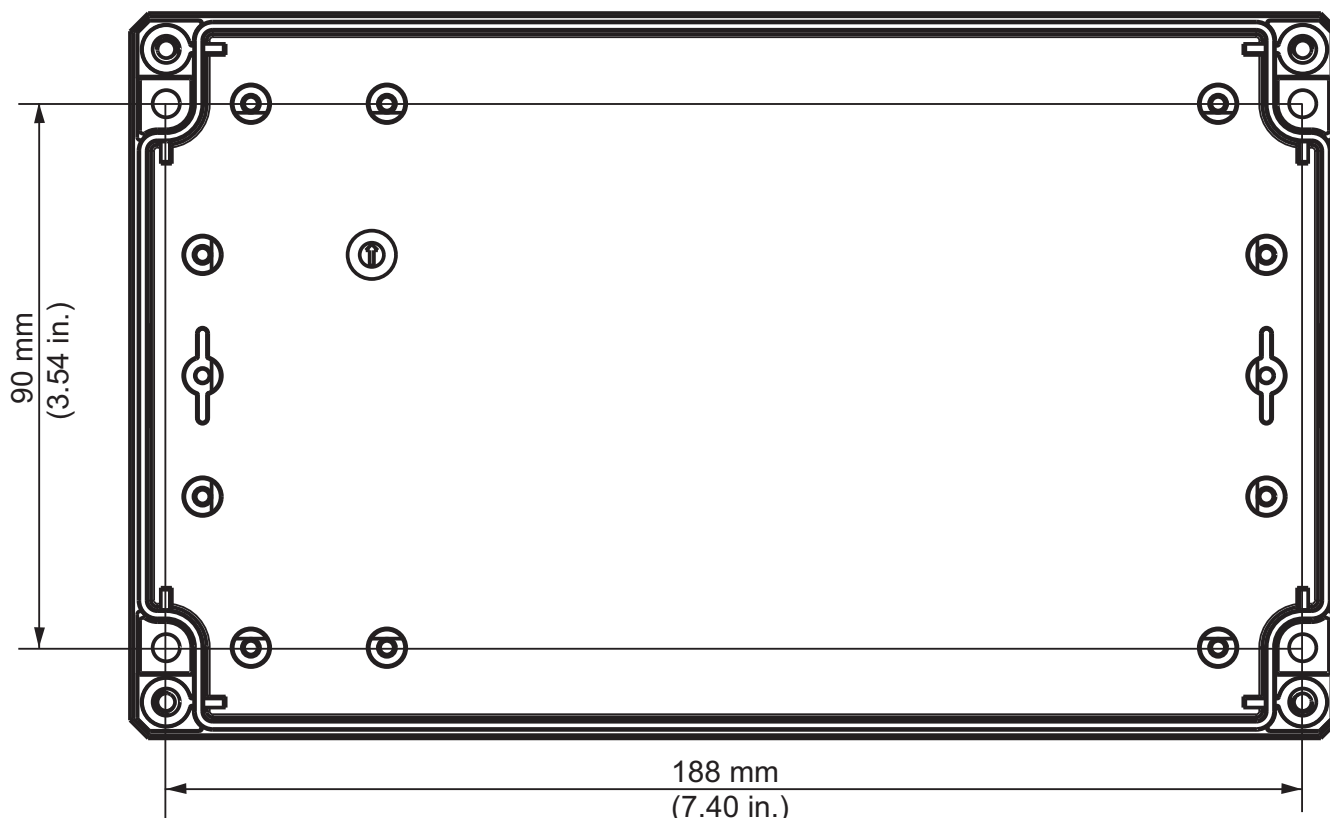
Dimensions, mounting holes, MIC-ALM-WAS-24
